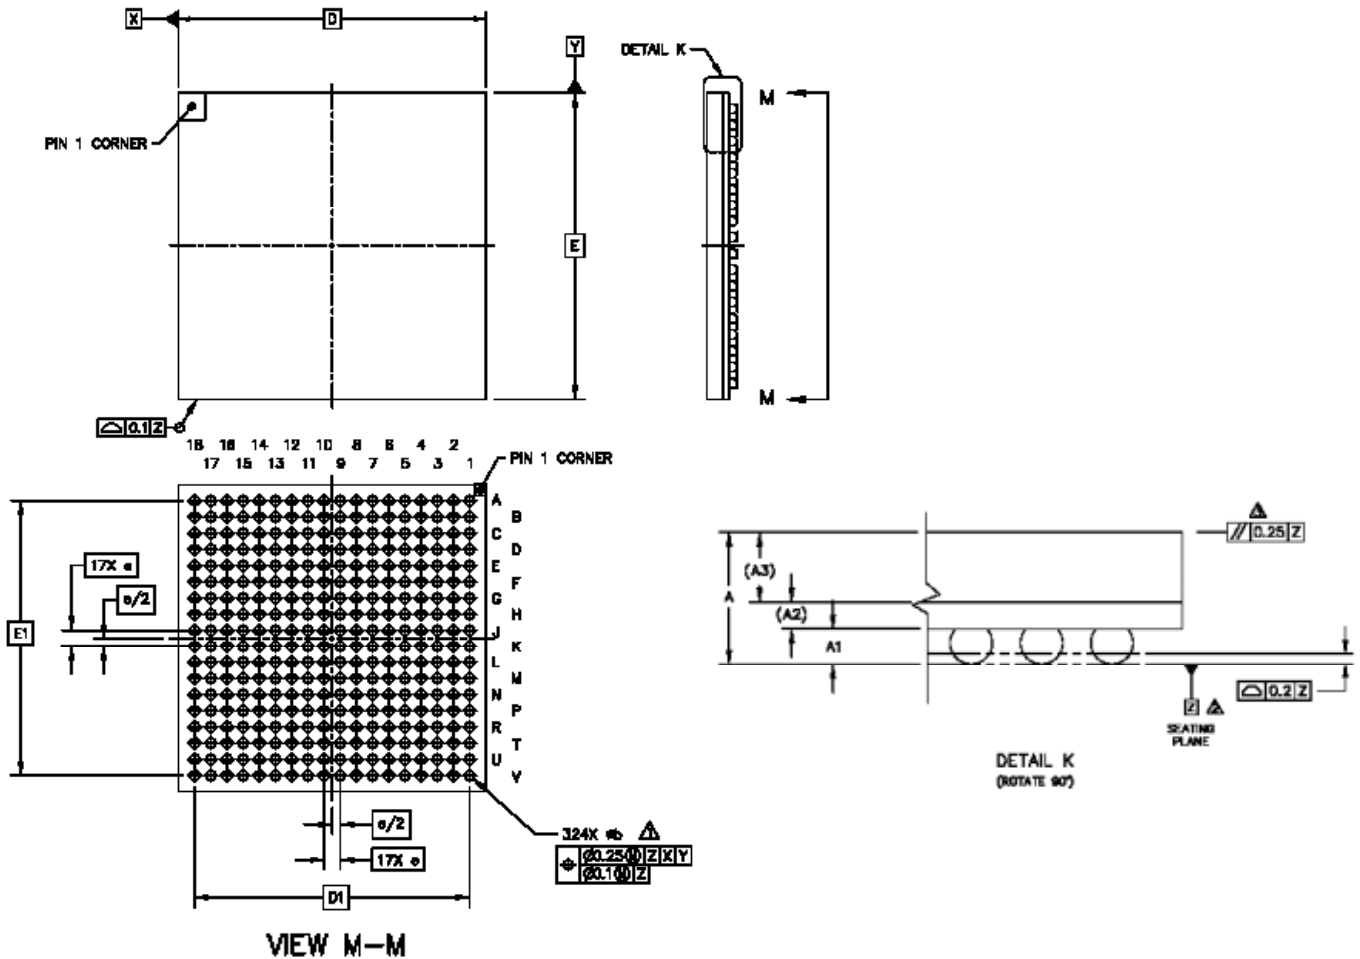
Package: BGA 324, 19 x 19 mm, 324 balls, 1 mm ball pitch
